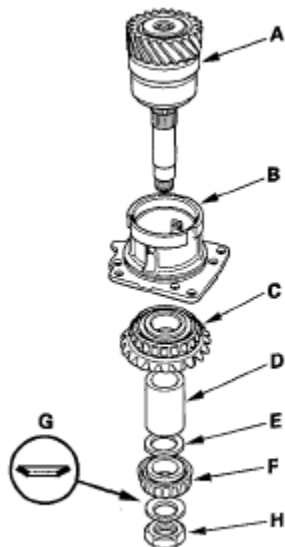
Identifying Transfer Shaft Assembly, Transfer Holder And Transfer Drive Gear
